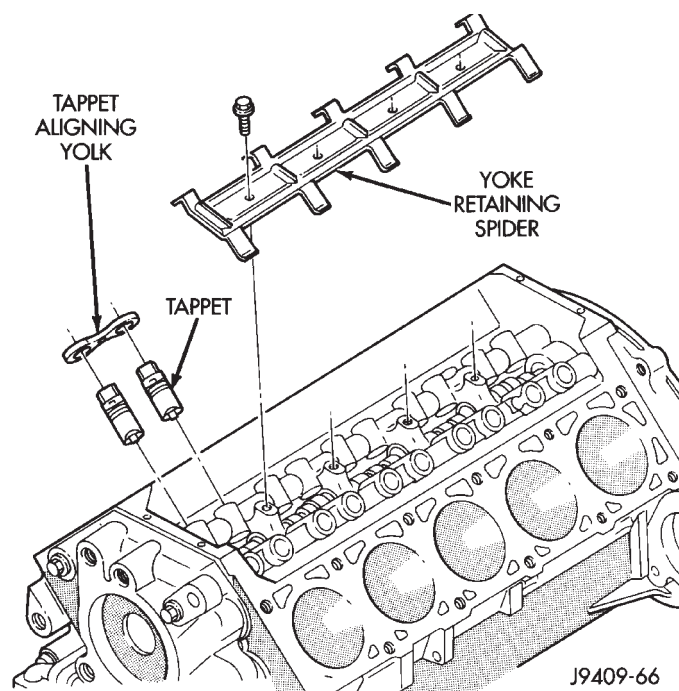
Tappets, Aligning Yoke and Yoke Retaining Spider
